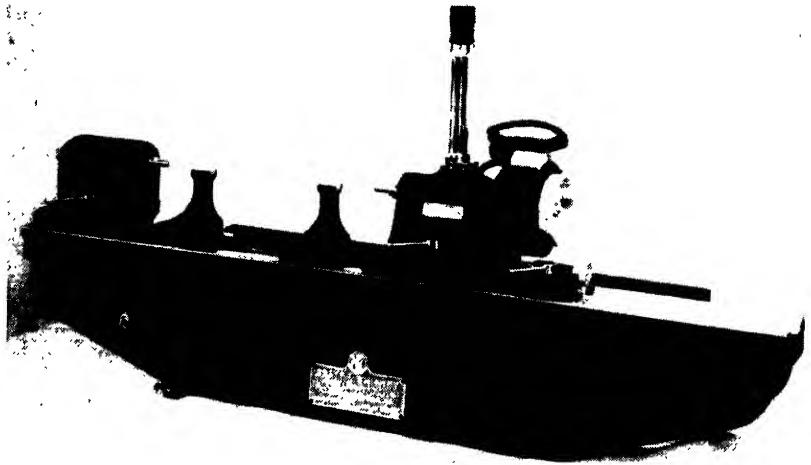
2. The Standard measuring machine. (Courtesy of Pratt & Whitney Division, Niles-Bement-Pond Company.)
